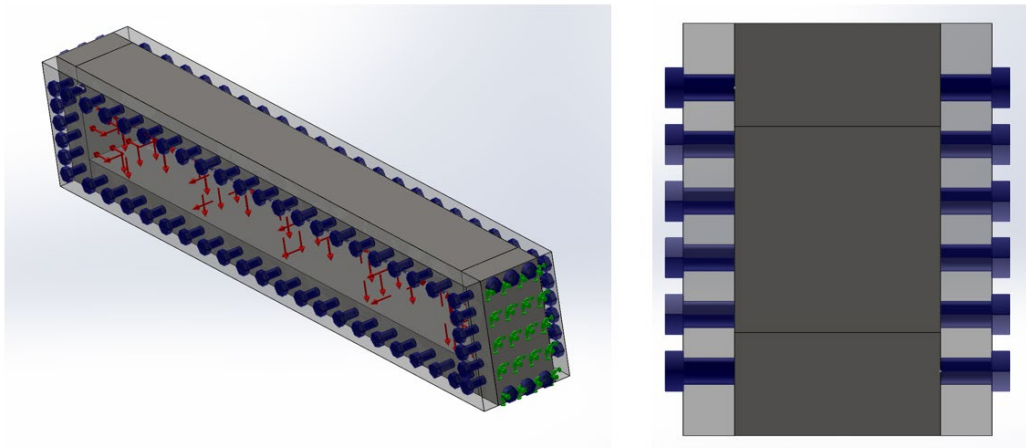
Test Section Redesign 3, Bolt-on windows remake
